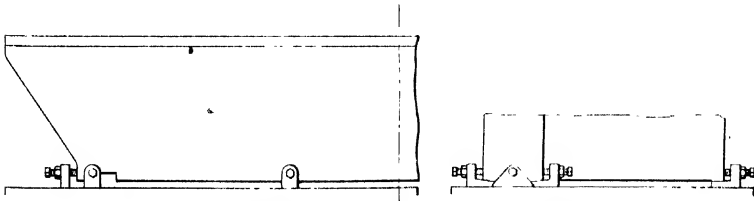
HALF-ELEVATION AND END VIEW OF GRINDING-MACHINE BASE
